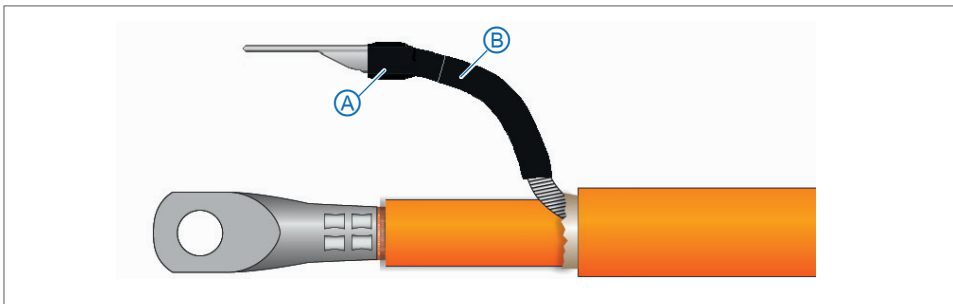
Step 6: Pull the "Braided shield 2" heat-shrink tubing onto the braided shield and fix in place
